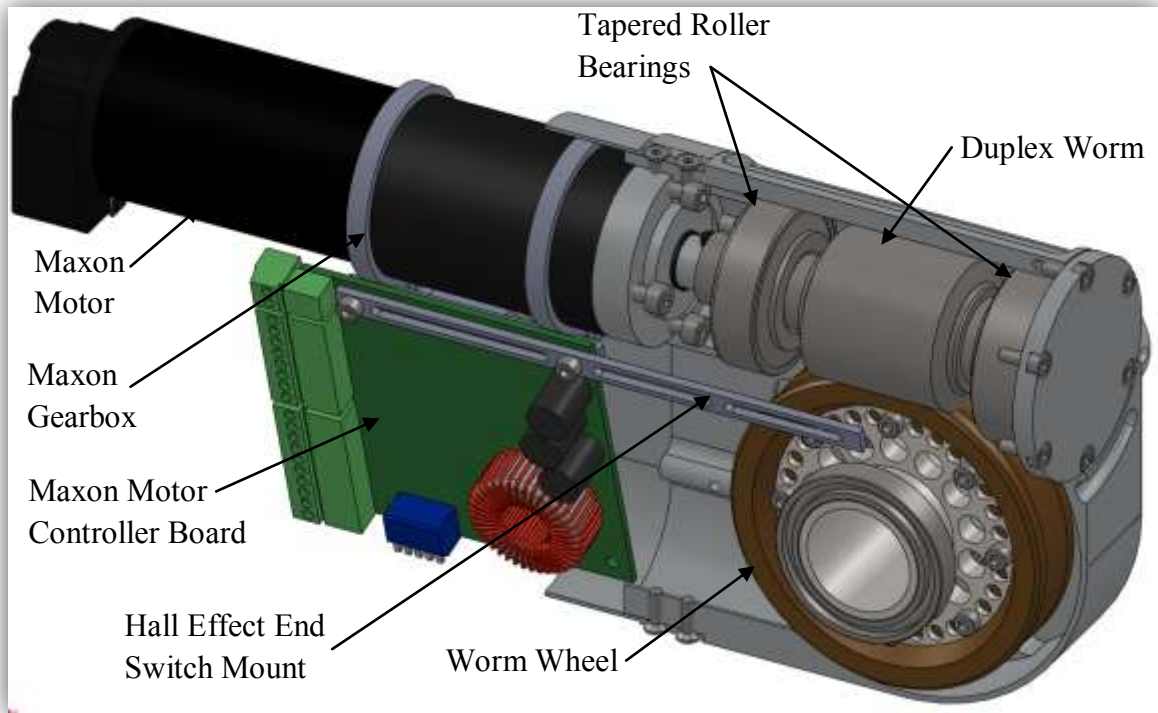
Figure IV: Cutaway of Gearbox Housing showing the Internal Components
